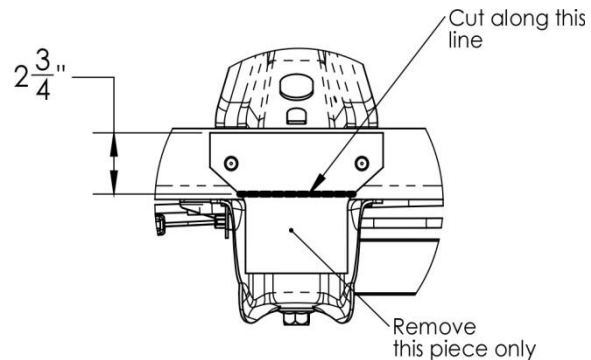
Passenger Side Parking Brake Cable Retainers at Axle
